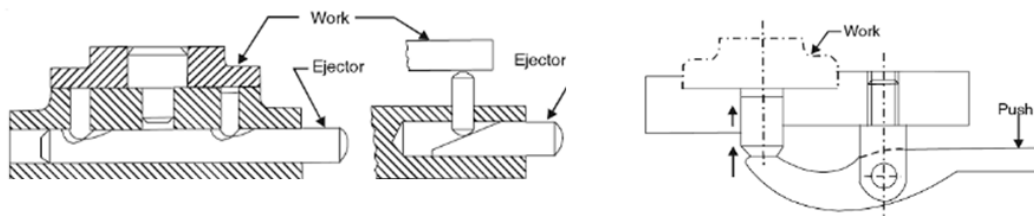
(Left) sliding ejector pin mechanism. (Right) hinged ejector pin mechanism [29]
